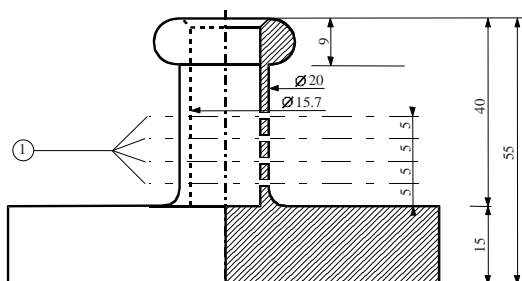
Hollow bronze cylinder, closed at one end; Plan and cut dimensions in mm
